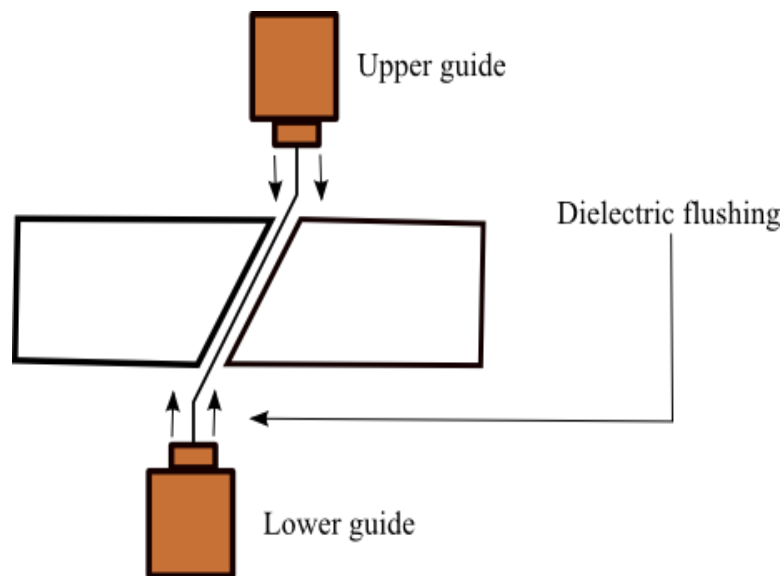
Relative displacement of taper and lower guides in WEDM taper-cutting
